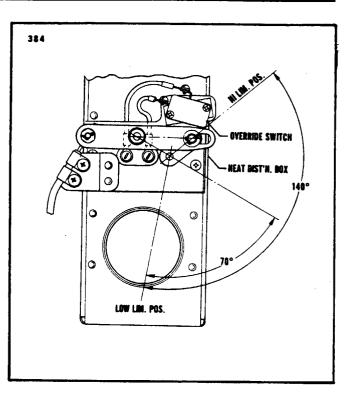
Top View - Duct Switch 39D59 Heater System No. 2, B39D59 and D39D59 Heater System
